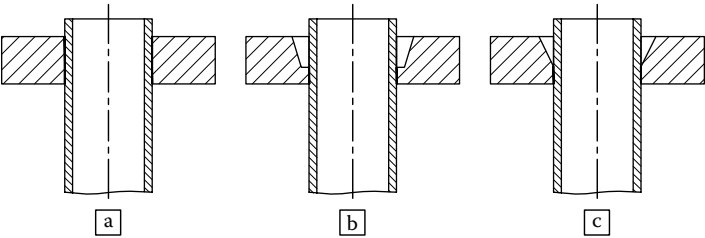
Tube-to-tubesheet joint configuration for welding of protruding tube.
